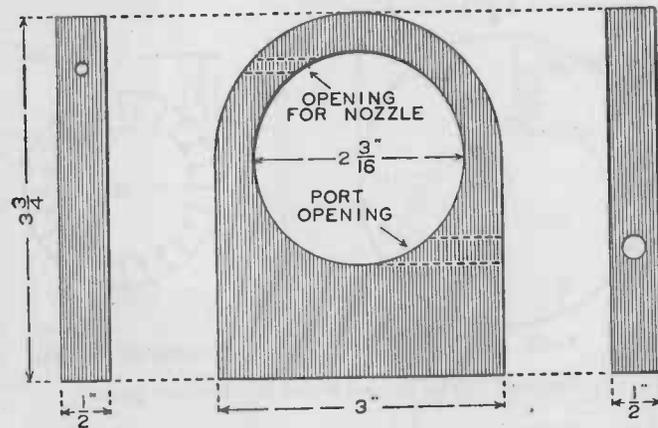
The turbine casing is made of wood in the shape and according to the dimensions shown above.
